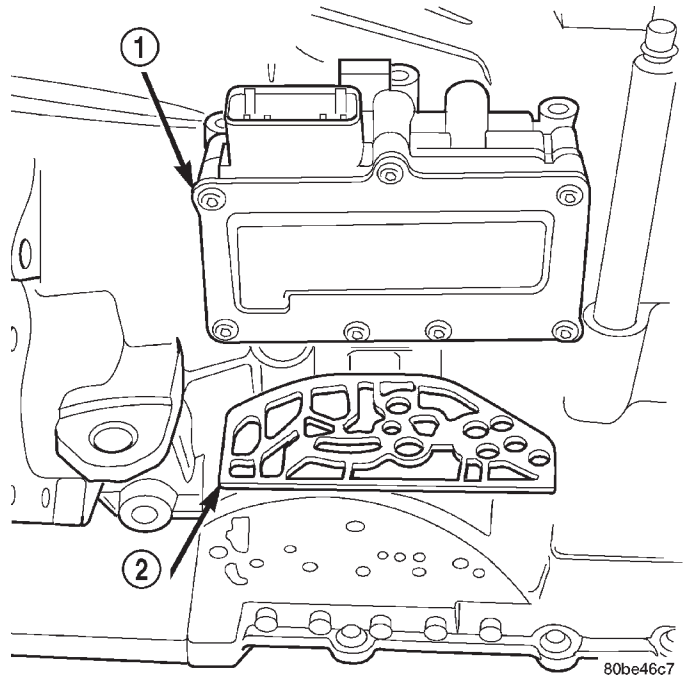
Solenoid/Pressure Switch Assembly and Gasket
